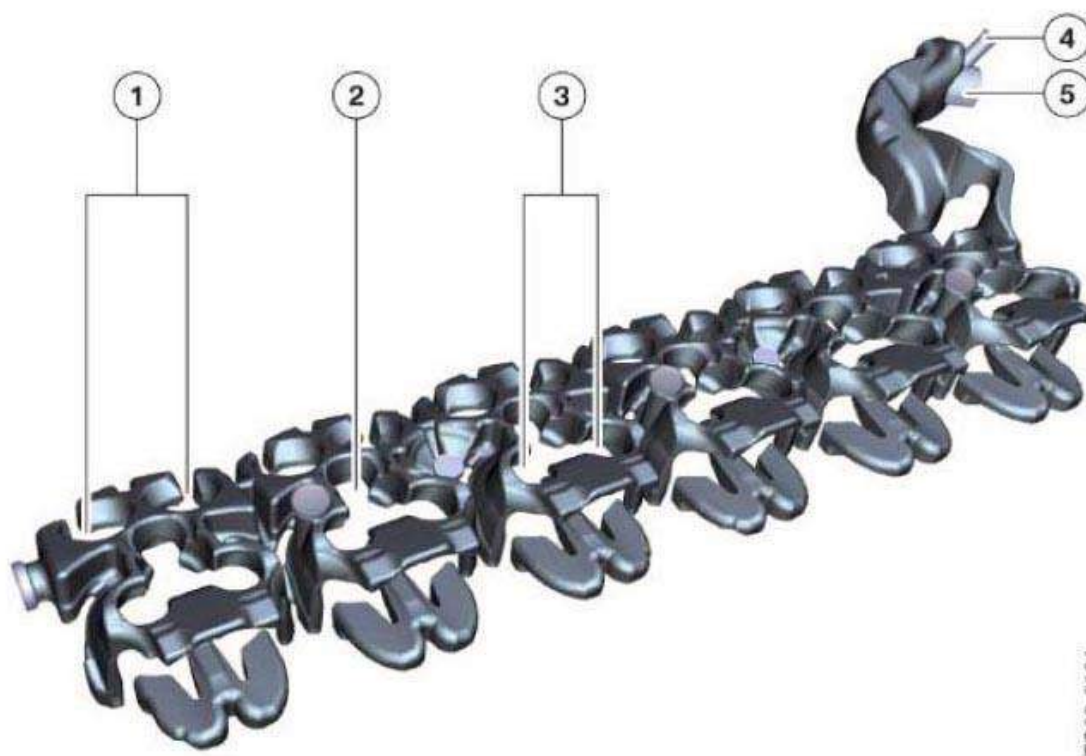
Casting Of Coolant Passages In Cylinder Head - N55
